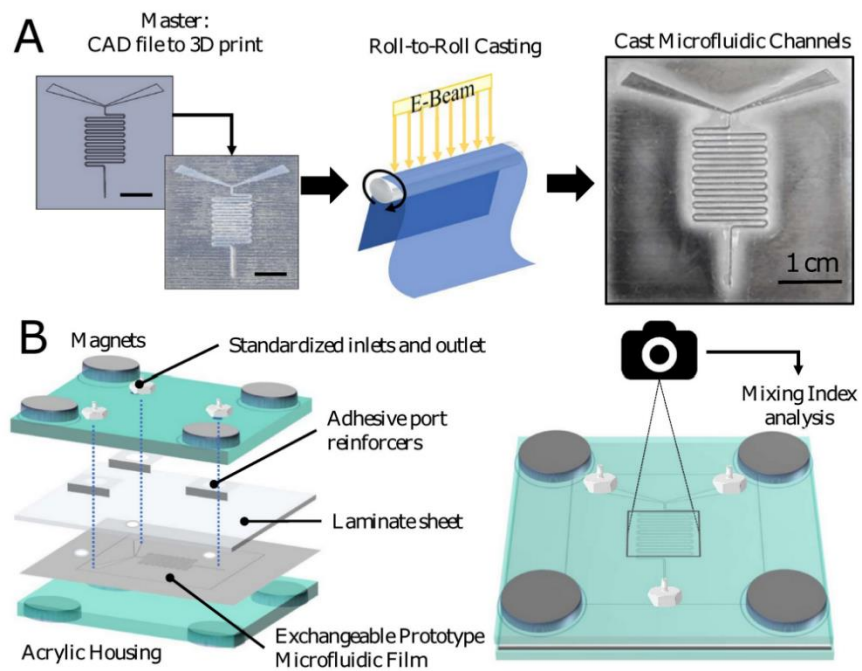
Major processing steps in a roll-to-roll forming process utilizing a polymer mold (Boutiette et al. [79])
